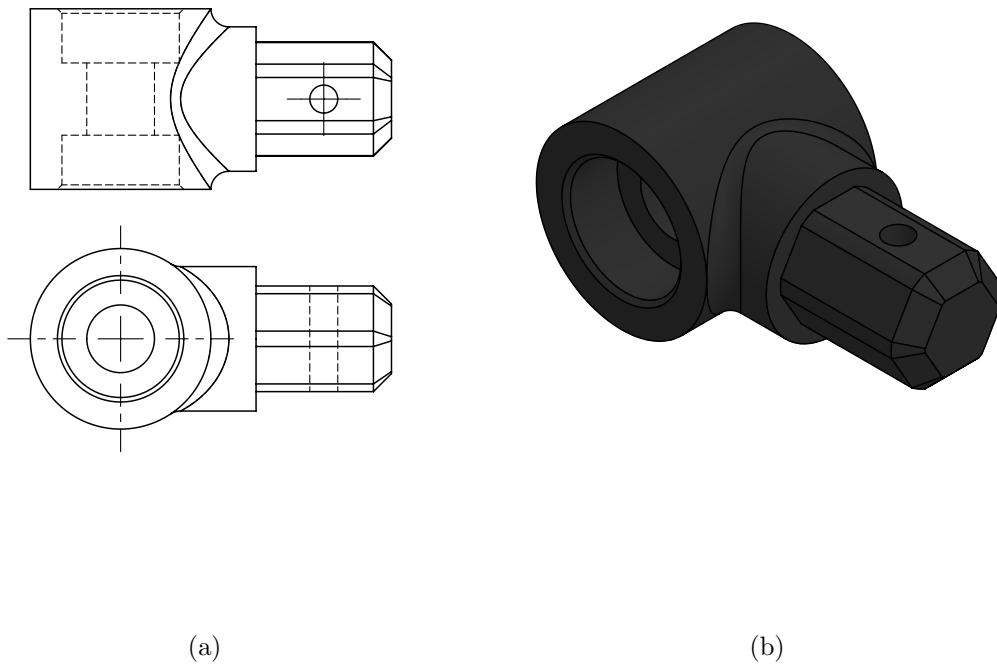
Detailed drawings of the free bogie joint component for one side of the suspension system
